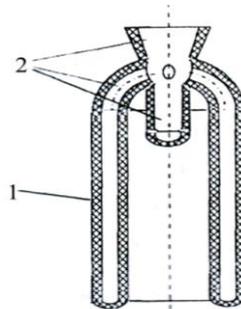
The design of the ceramic shell mold for casting of tube billets: 1- tubular shell part; 2 - gating system with molding cup [9]
